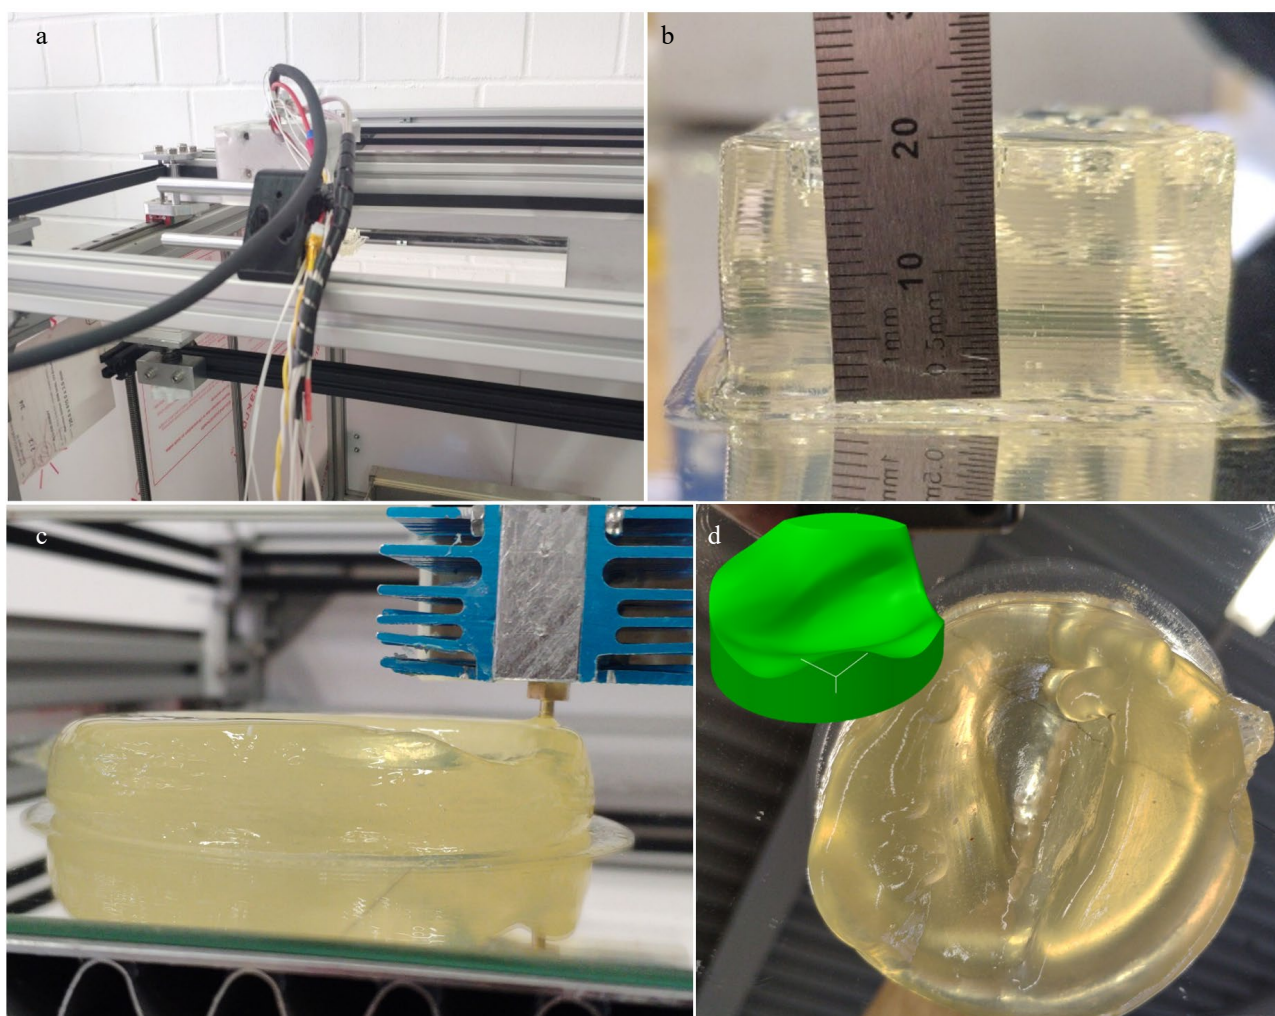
Integration of the tube heater into the biomaterial printer and printing results with 10% gelatine. (a) View of the printer with the integrated tube heater system. (b) printed cube of 40x40x20 mm. (c) mid print of an organic indentation structure. (d) top view of the printed organic structure out of 10% gelatine and isometric view of the design file in green.
